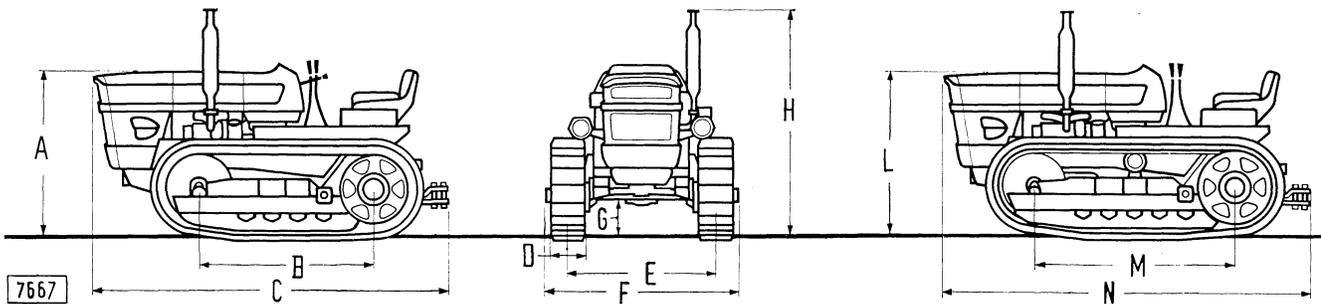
Overall Dimensions of Standard Tractors - mm. (in.).
